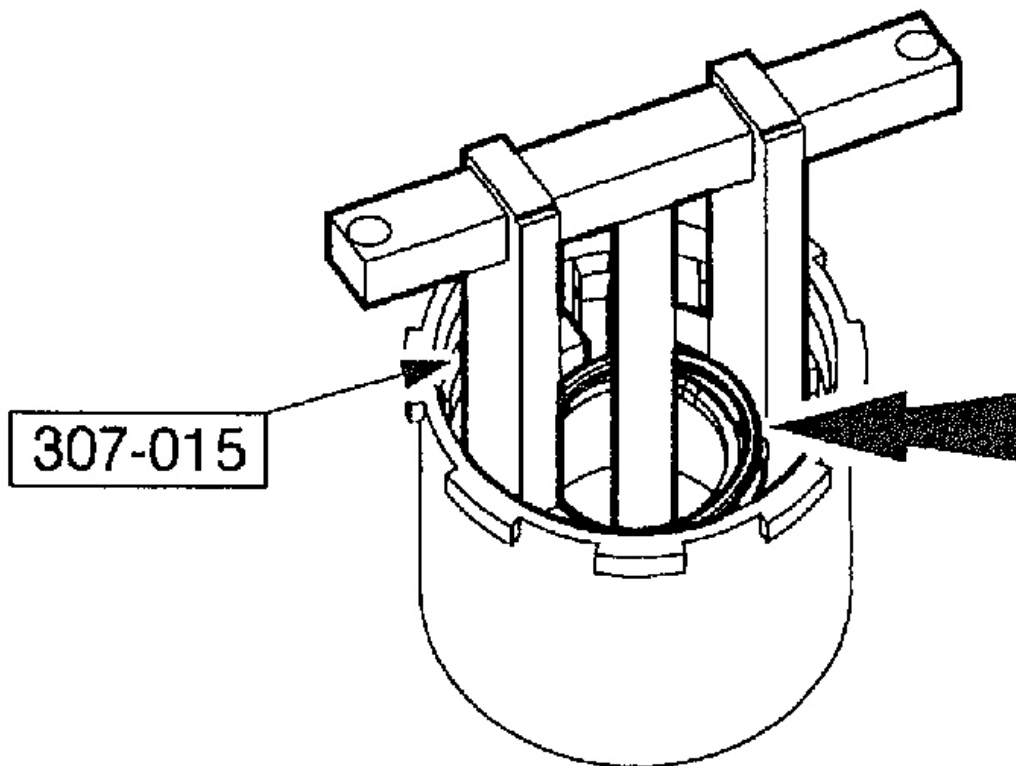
Installing Direct Clutch Piston Springs & Retainer
